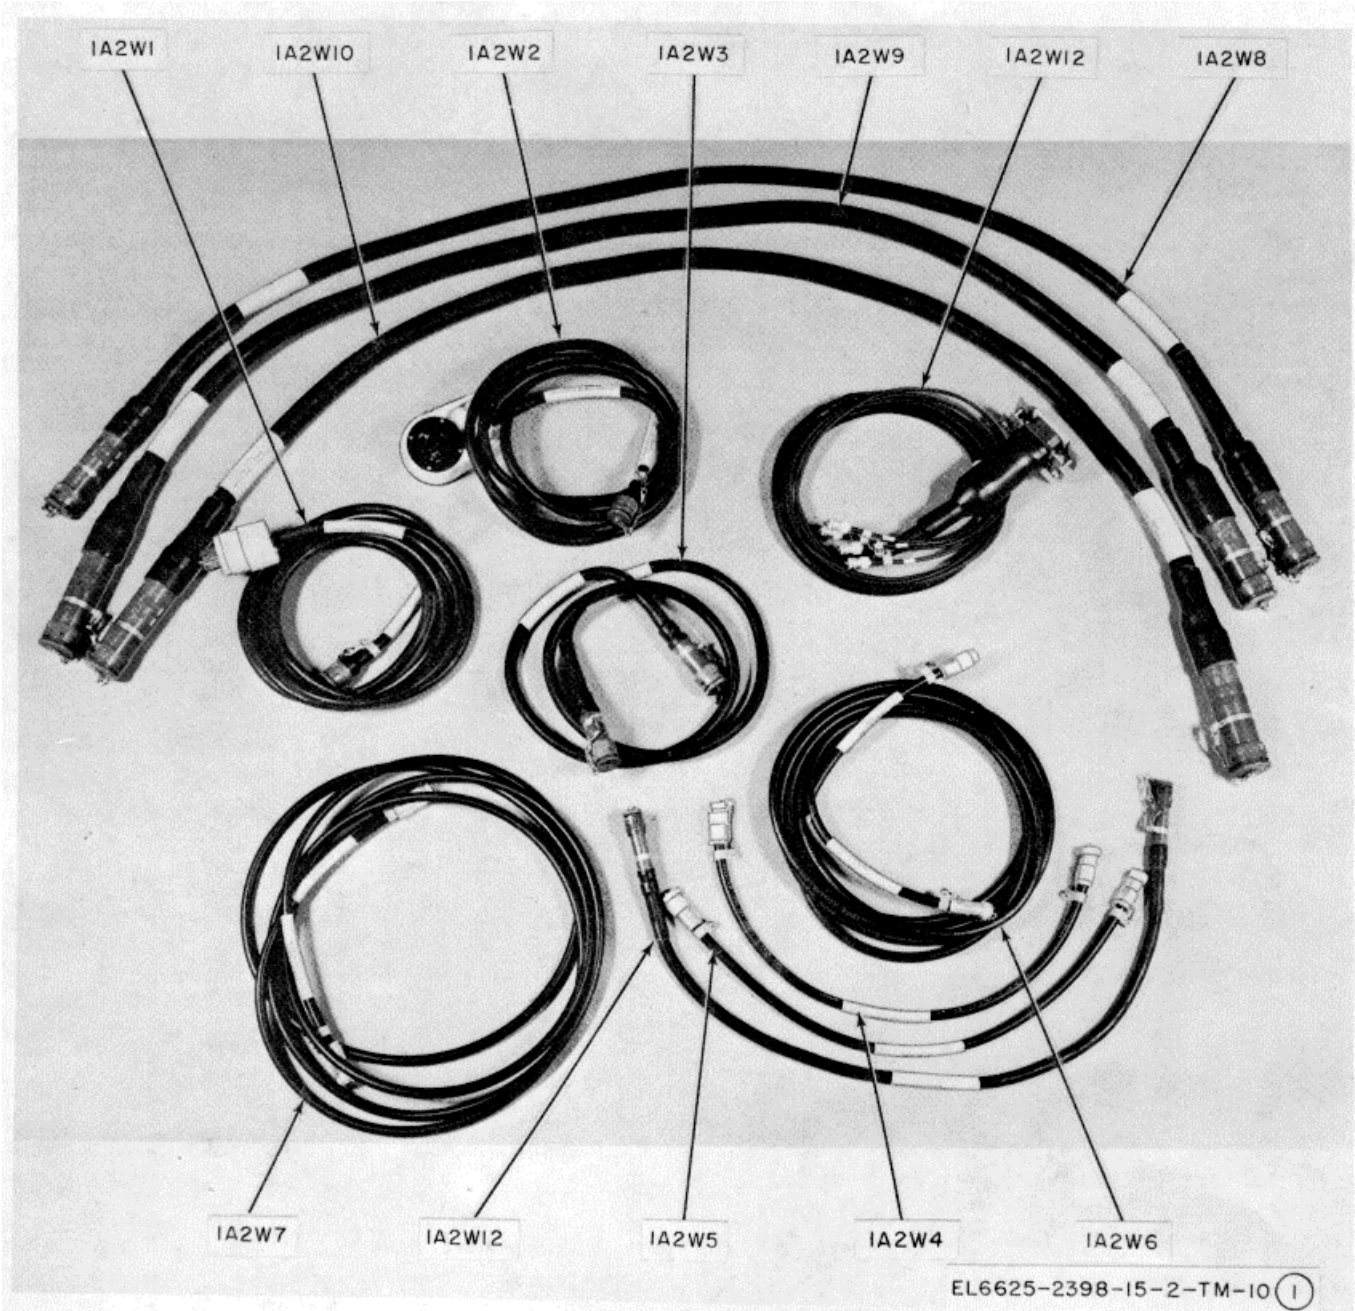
(1). Cable assemblies (sheet 1 of 5).
